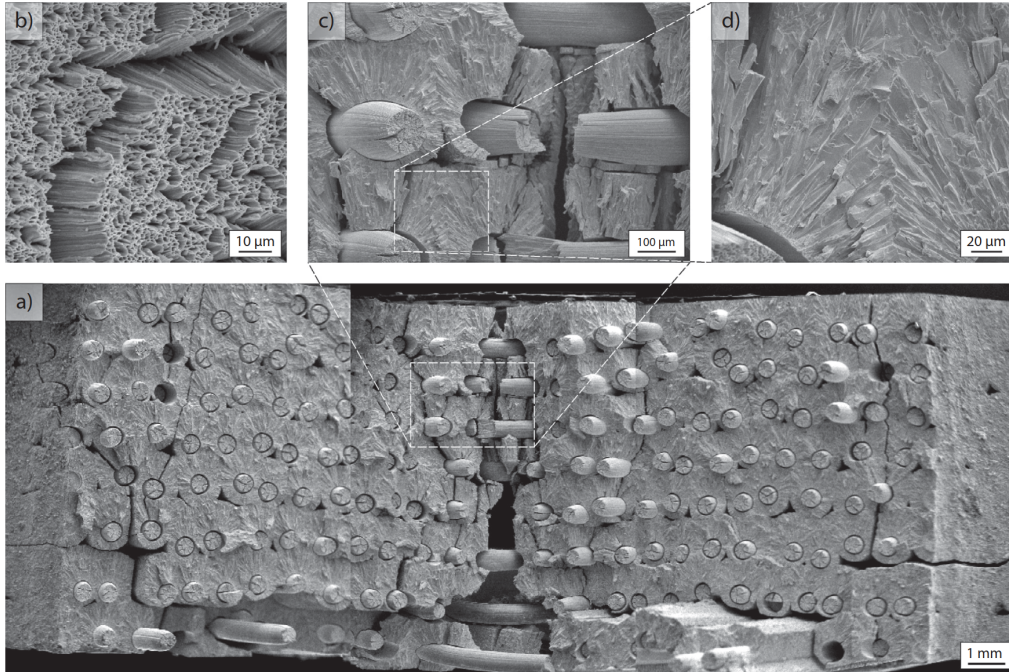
Fracture surface of a tungsten fibre-reinforced tungsten composite after Charpy impact testing [78]: Subfigures b) and d) show the ductile fracture surface of the tungsten wire and the brittle fracture surface of the CVD tungsten matrix, respectively.
